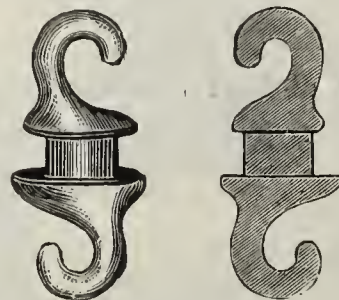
Metal Parts of Becker's Rubber Bucket.
